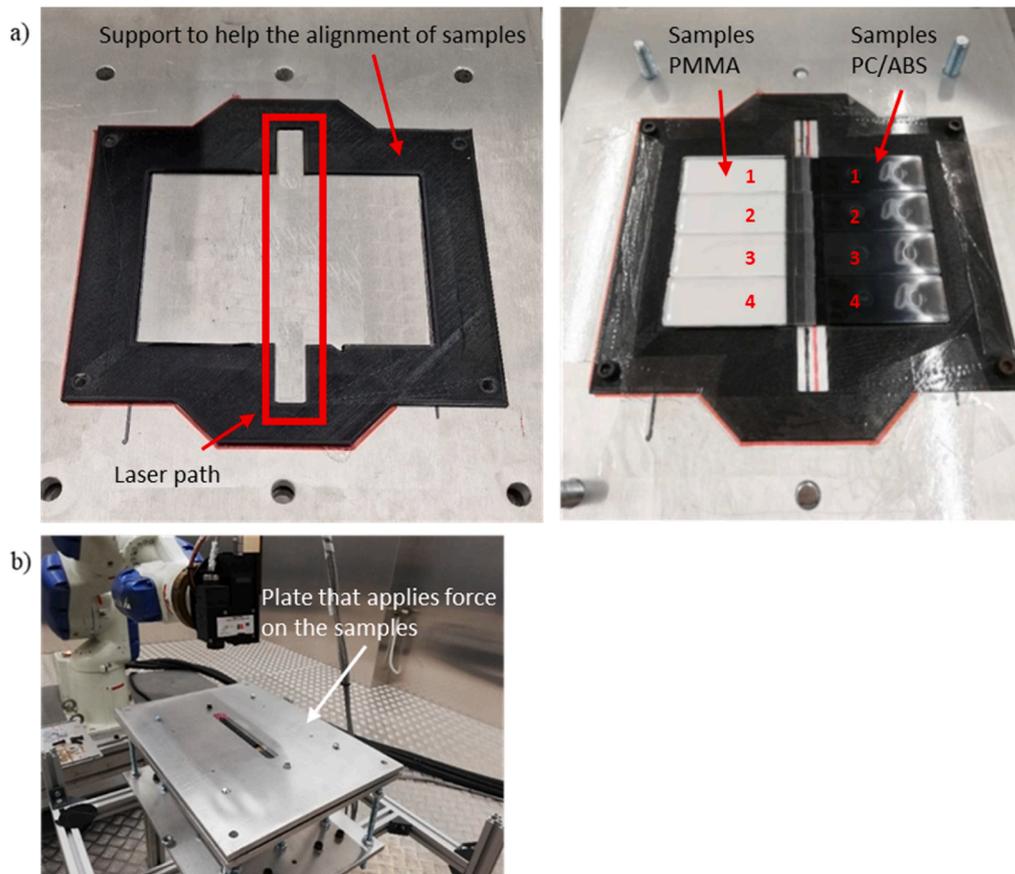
Welding process experimental set-up: a) alignment of the samples; b) application of clamp force.
